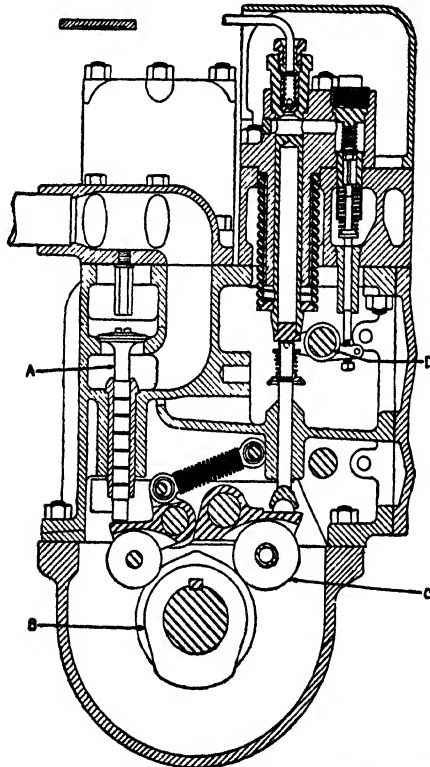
Fuel pump used in larger Fairbanks, Morse engines.
